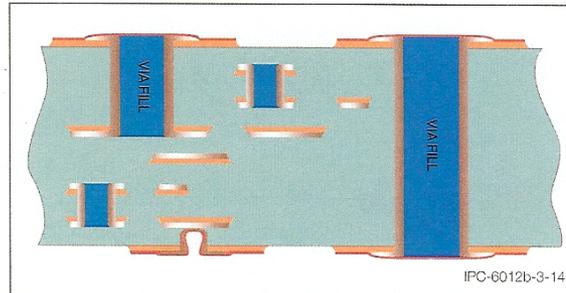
Wrap Copper in Type 4 PCB (Acceptable)
